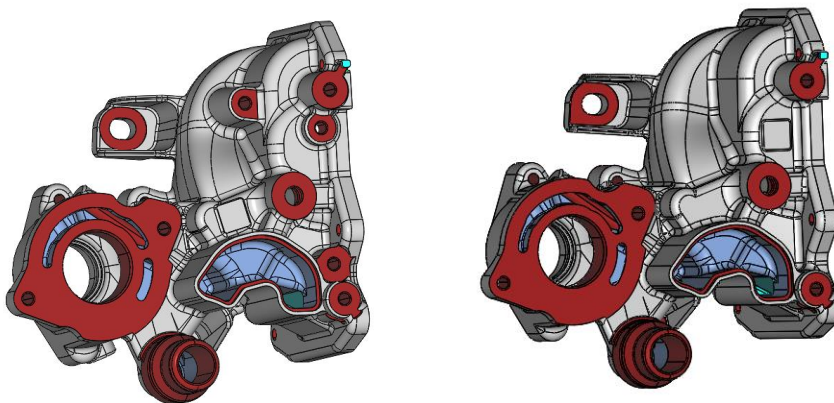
Changes in the Inlet casting from the 6th to the 7th version (Outside View)
